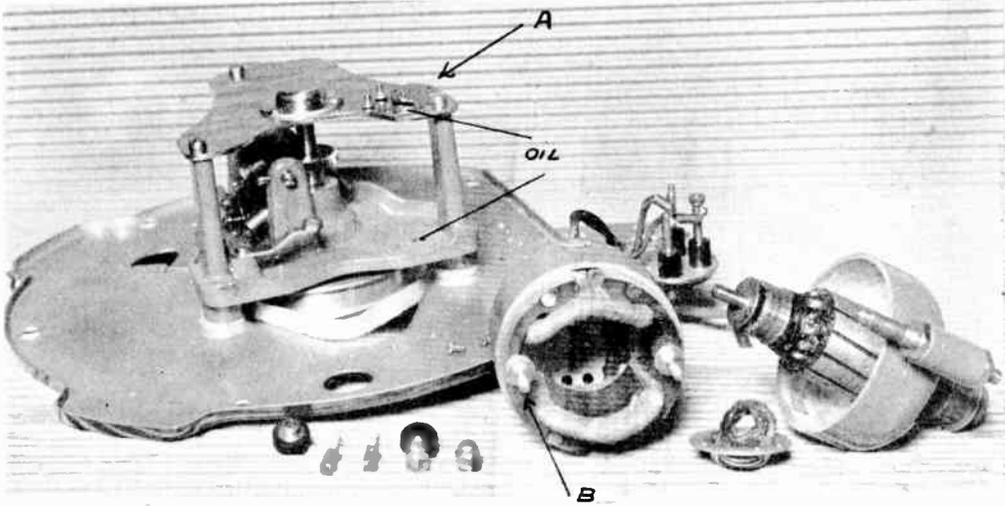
How to TAKE THE GARRARD Universal Motor Type E.D. APART FOR CLEANING THE COMMUTATOR, ETC.
